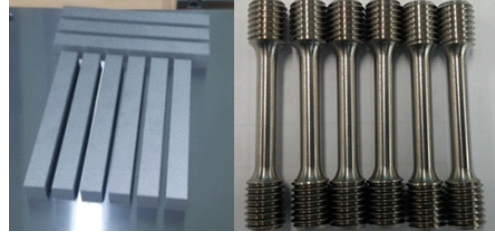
3D printed block(left) and Test pieces (ASTM E8)(right)
